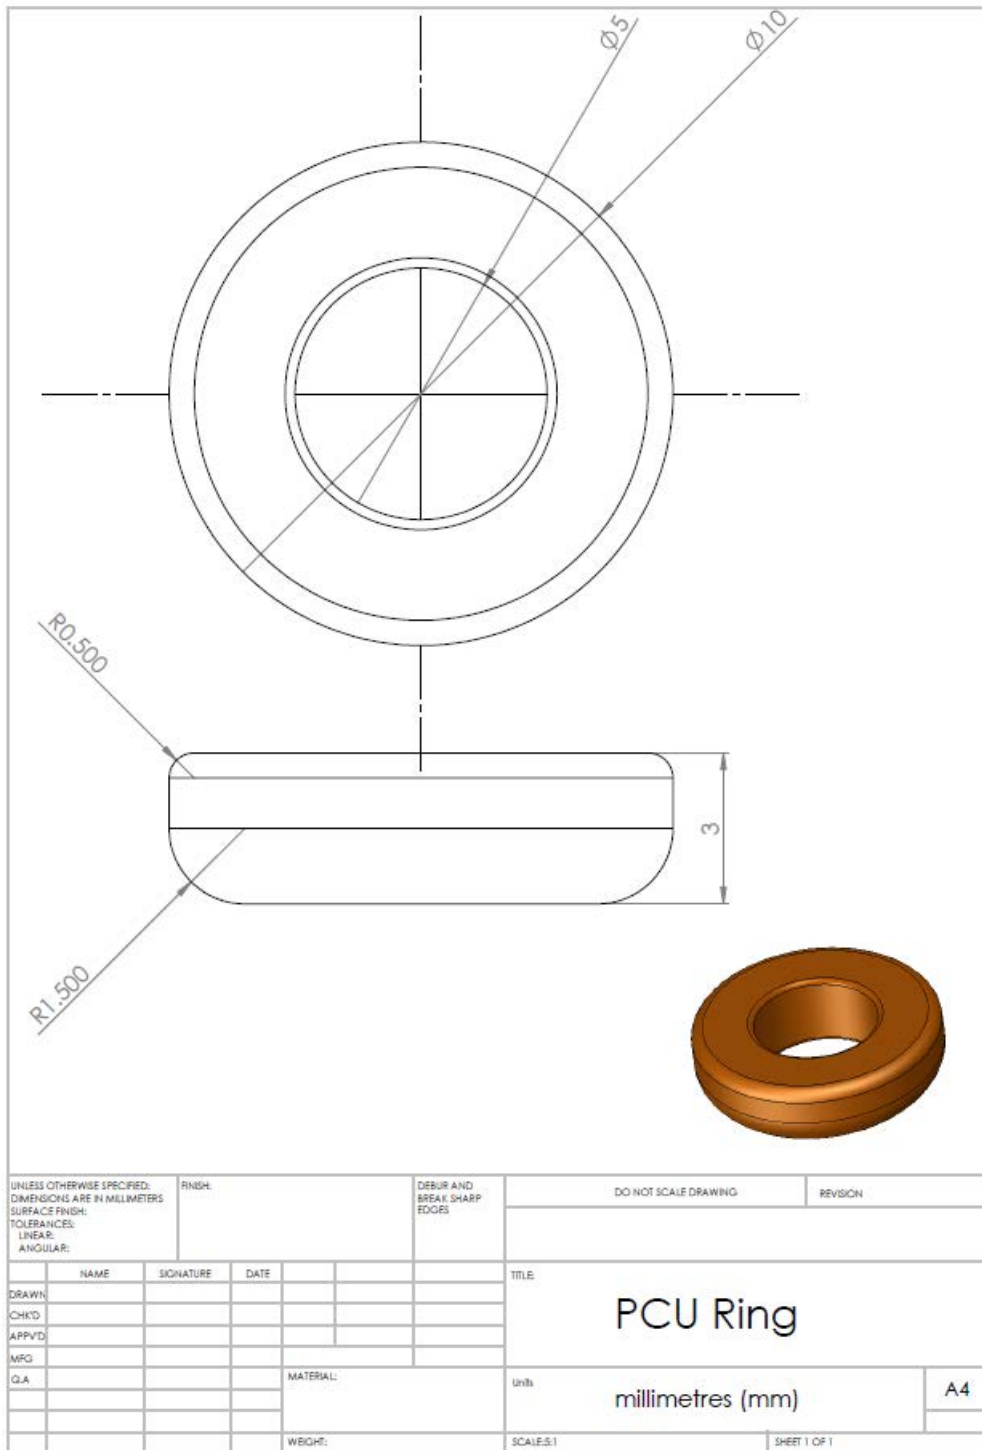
Dimensions of the PCU ring of the BDyn device
